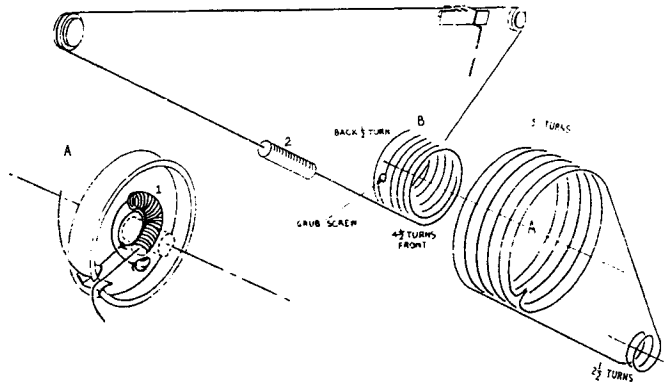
DRIVE CORDING DETAILS VIEWED FROM FRONT—GANG OPEN.
